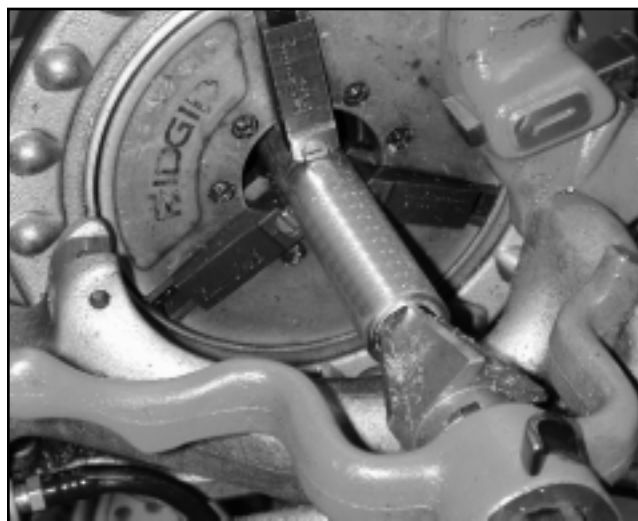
Insert the (flute) reamer into work piece and rotate until burr is removed.
